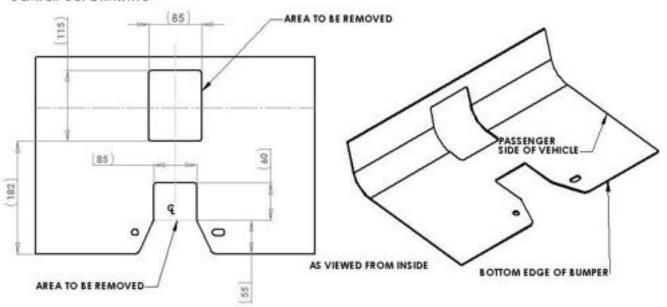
SUBARU OUTBACK BUMPER CUT DRAWING
